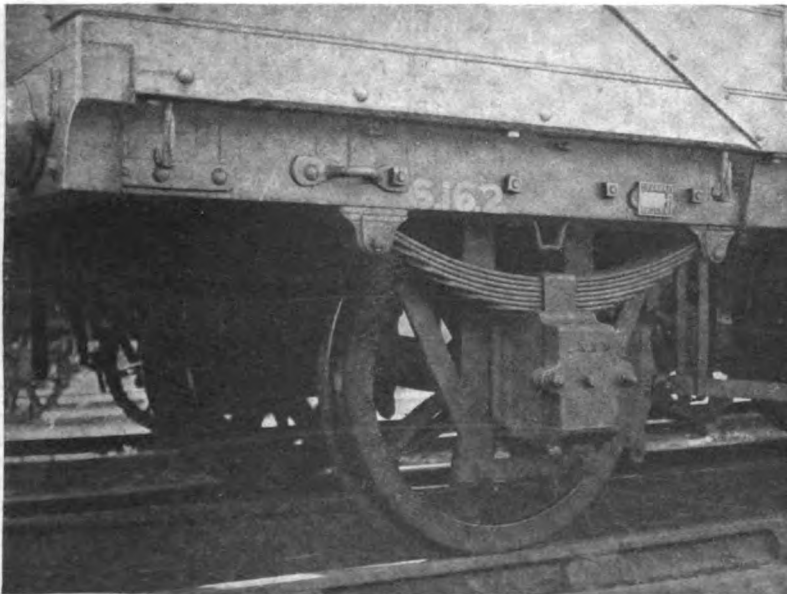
DETAIL PHOTOGRAPH OF L.N.W.R. TEUTON TRUCK, SHOWING OIL AXLE-BOXES AND SHAPED END OF BUFFER PLANK.
